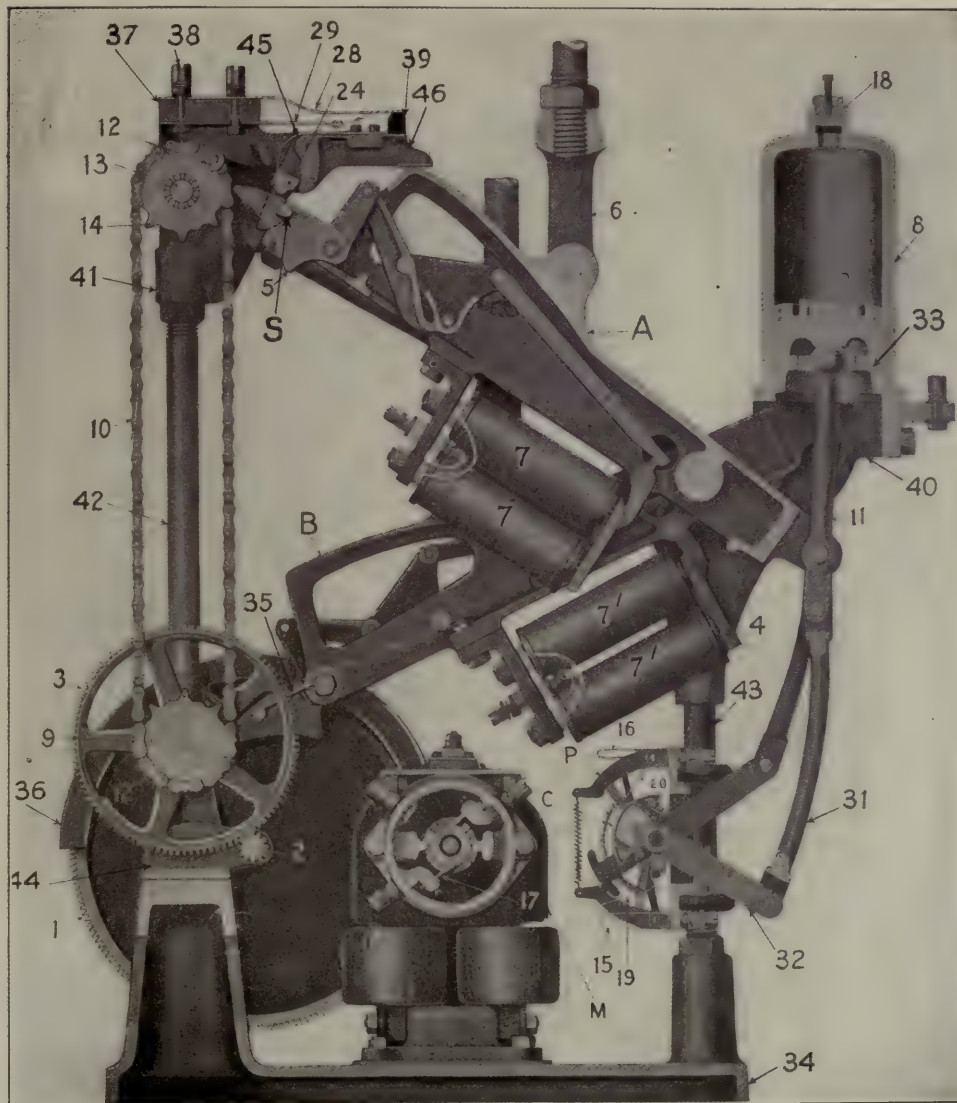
Sectional View, Style "B" Motor Mechanism. Union Switch & Signal Company.
